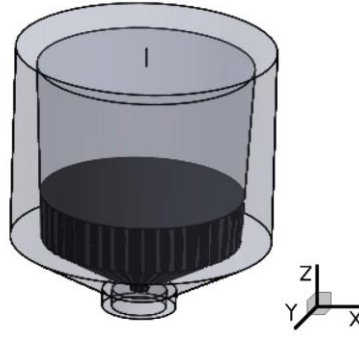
Part and mold: Opaque - part, transparency - mold
